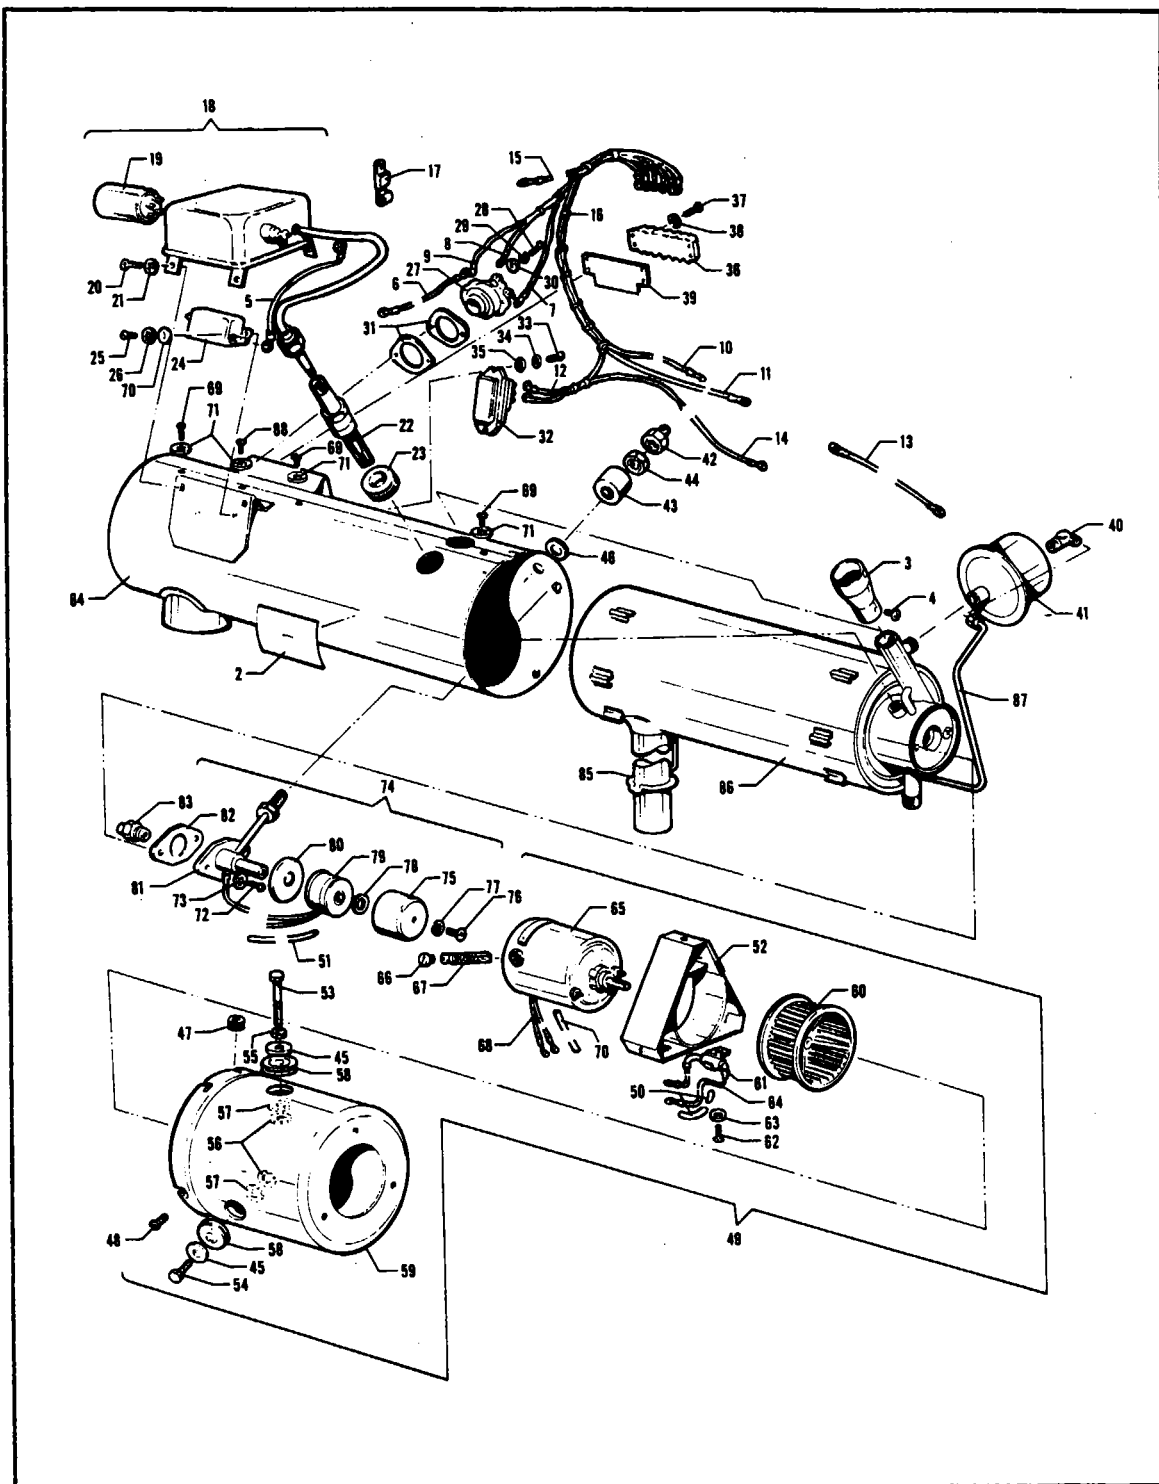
Exploded View of Heater Assembly No. 751 978 (14-volt) and 751 999 (28-volt)
